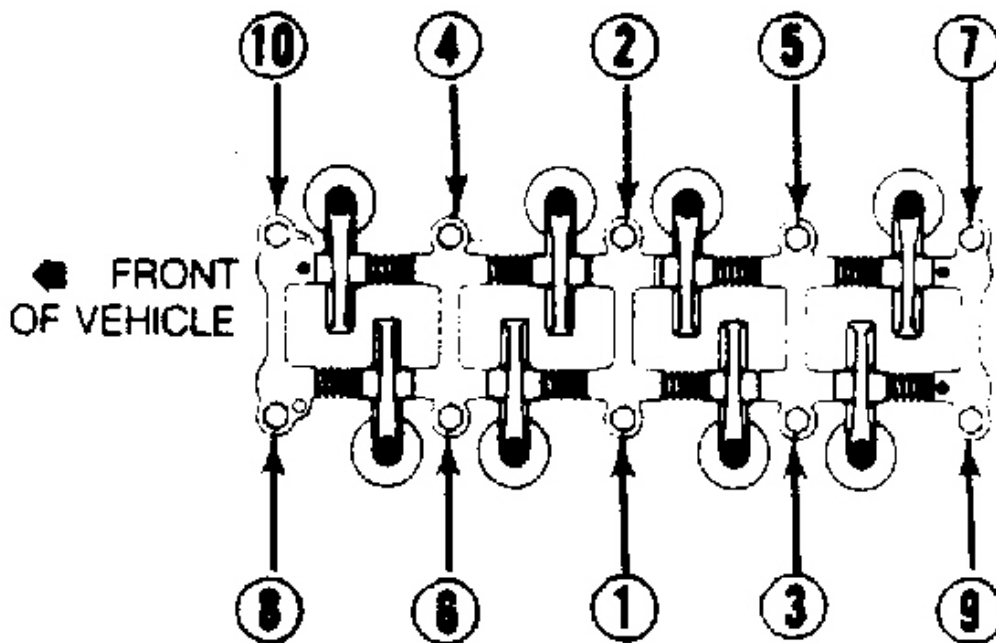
Cylinder Head/Rocker Arm Bolt Tightening Sequence
